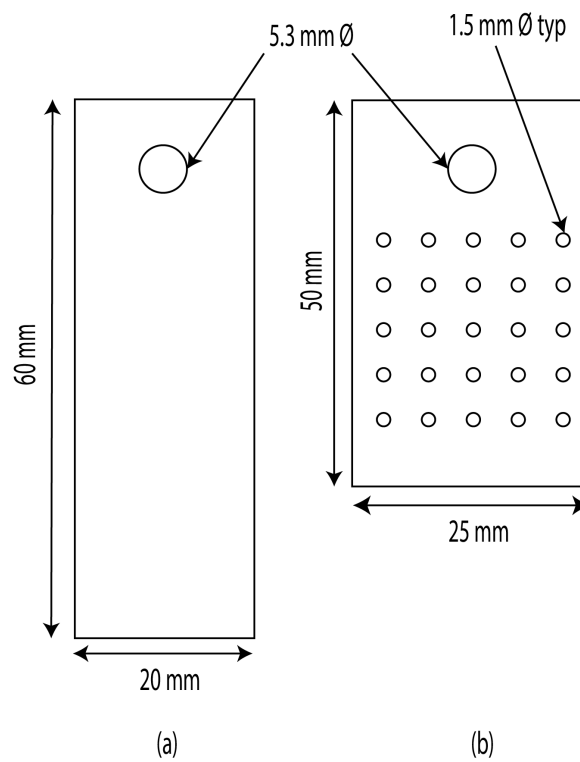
A diagram of the plate samples used. Design (a) was used for non-jetting and side-on jetting, (b) was used for through-hole jetting.
